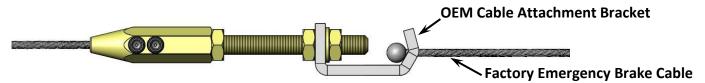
Attachment to Factory Park Brake Cables w/ Provided Connectors
